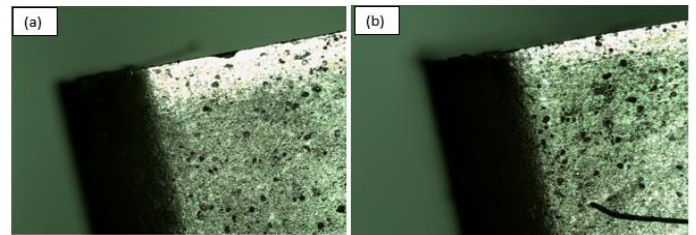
Captured SEM images for tool wear at $V = 1600$ RPM, $f = 0.15$ mm/rev and $a_p = 0.6$ mm (a) Untextured tool (b) Textured tool.
